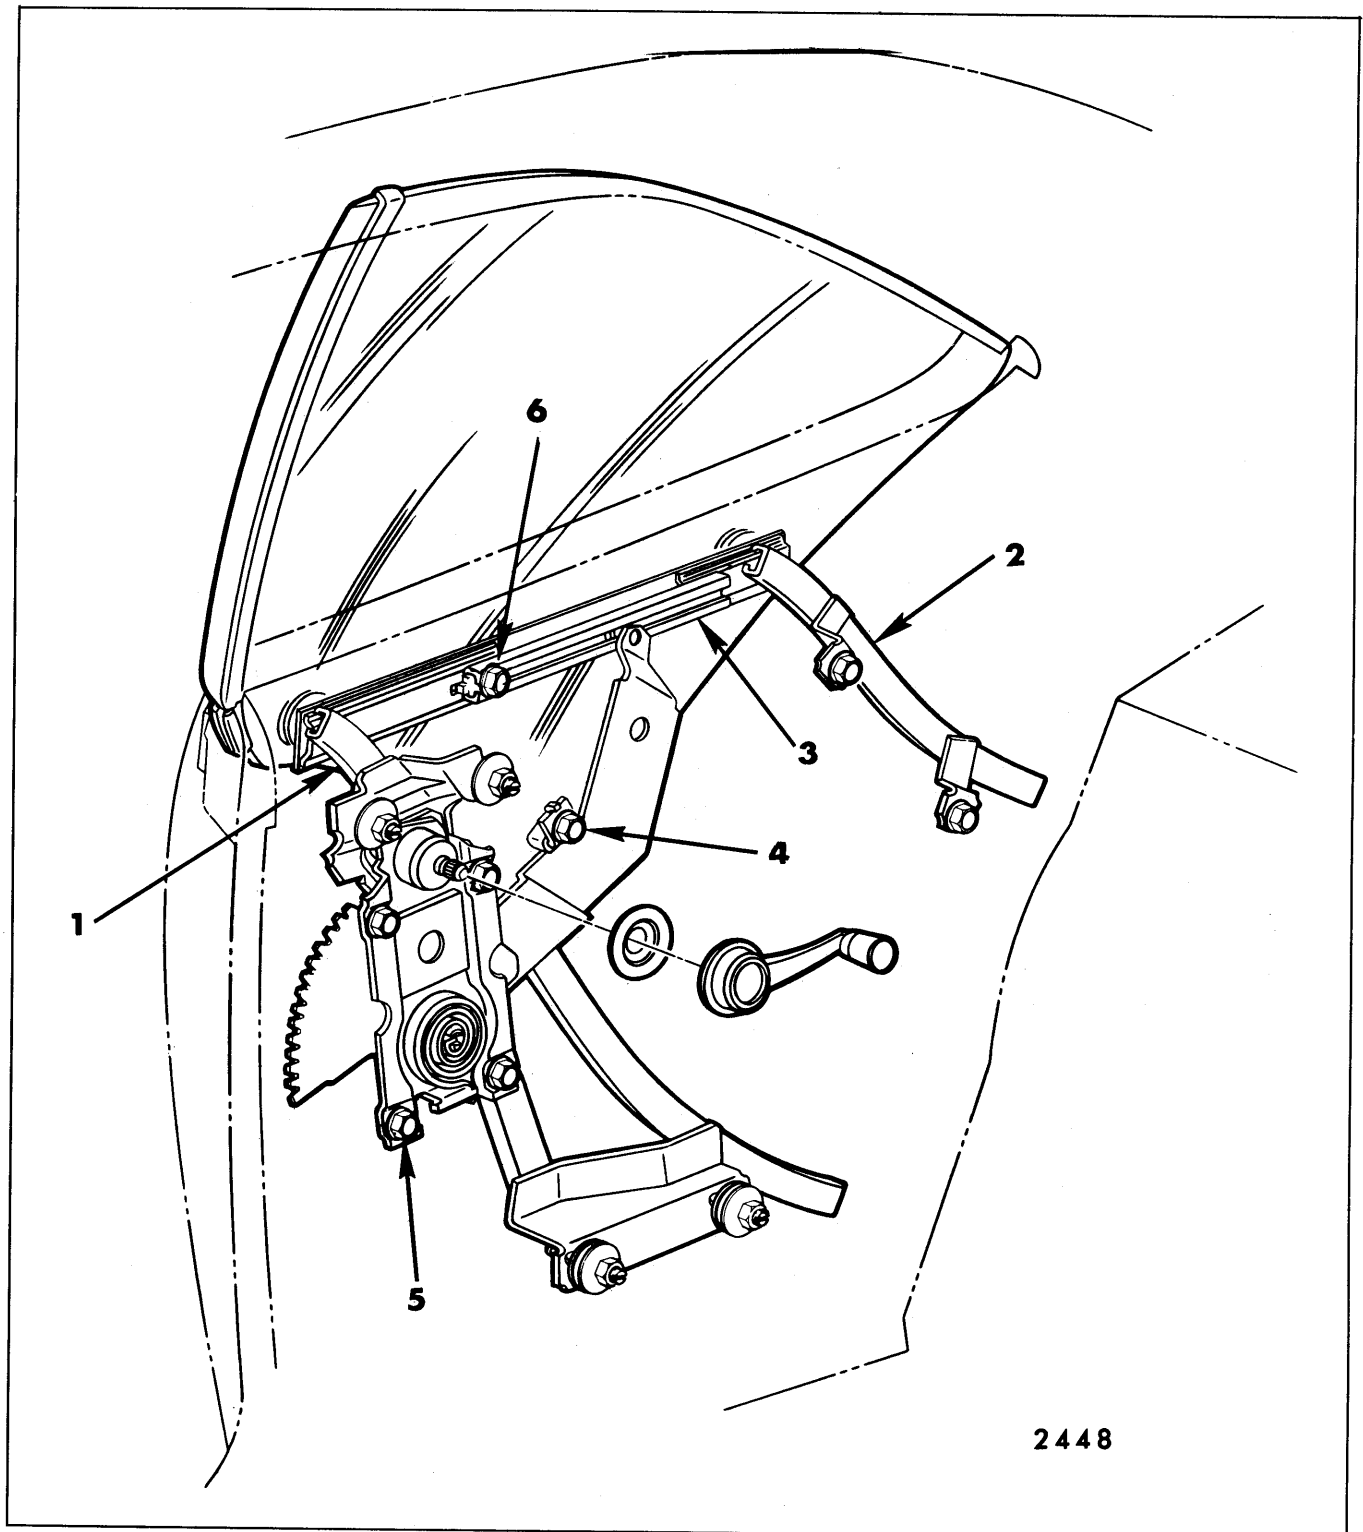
Rear Quarter Hardware - "Z-37" Styles
